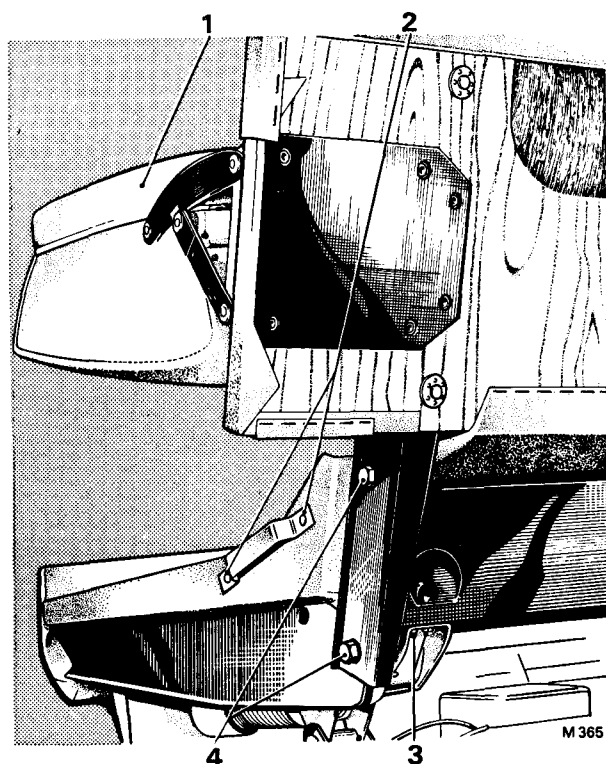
POSITION OF THE INBOARD SCREWS SECURING THE FRONT SEAT BACKREST TO THE BASE (Long Wheelbase Cars with Centre Division)
